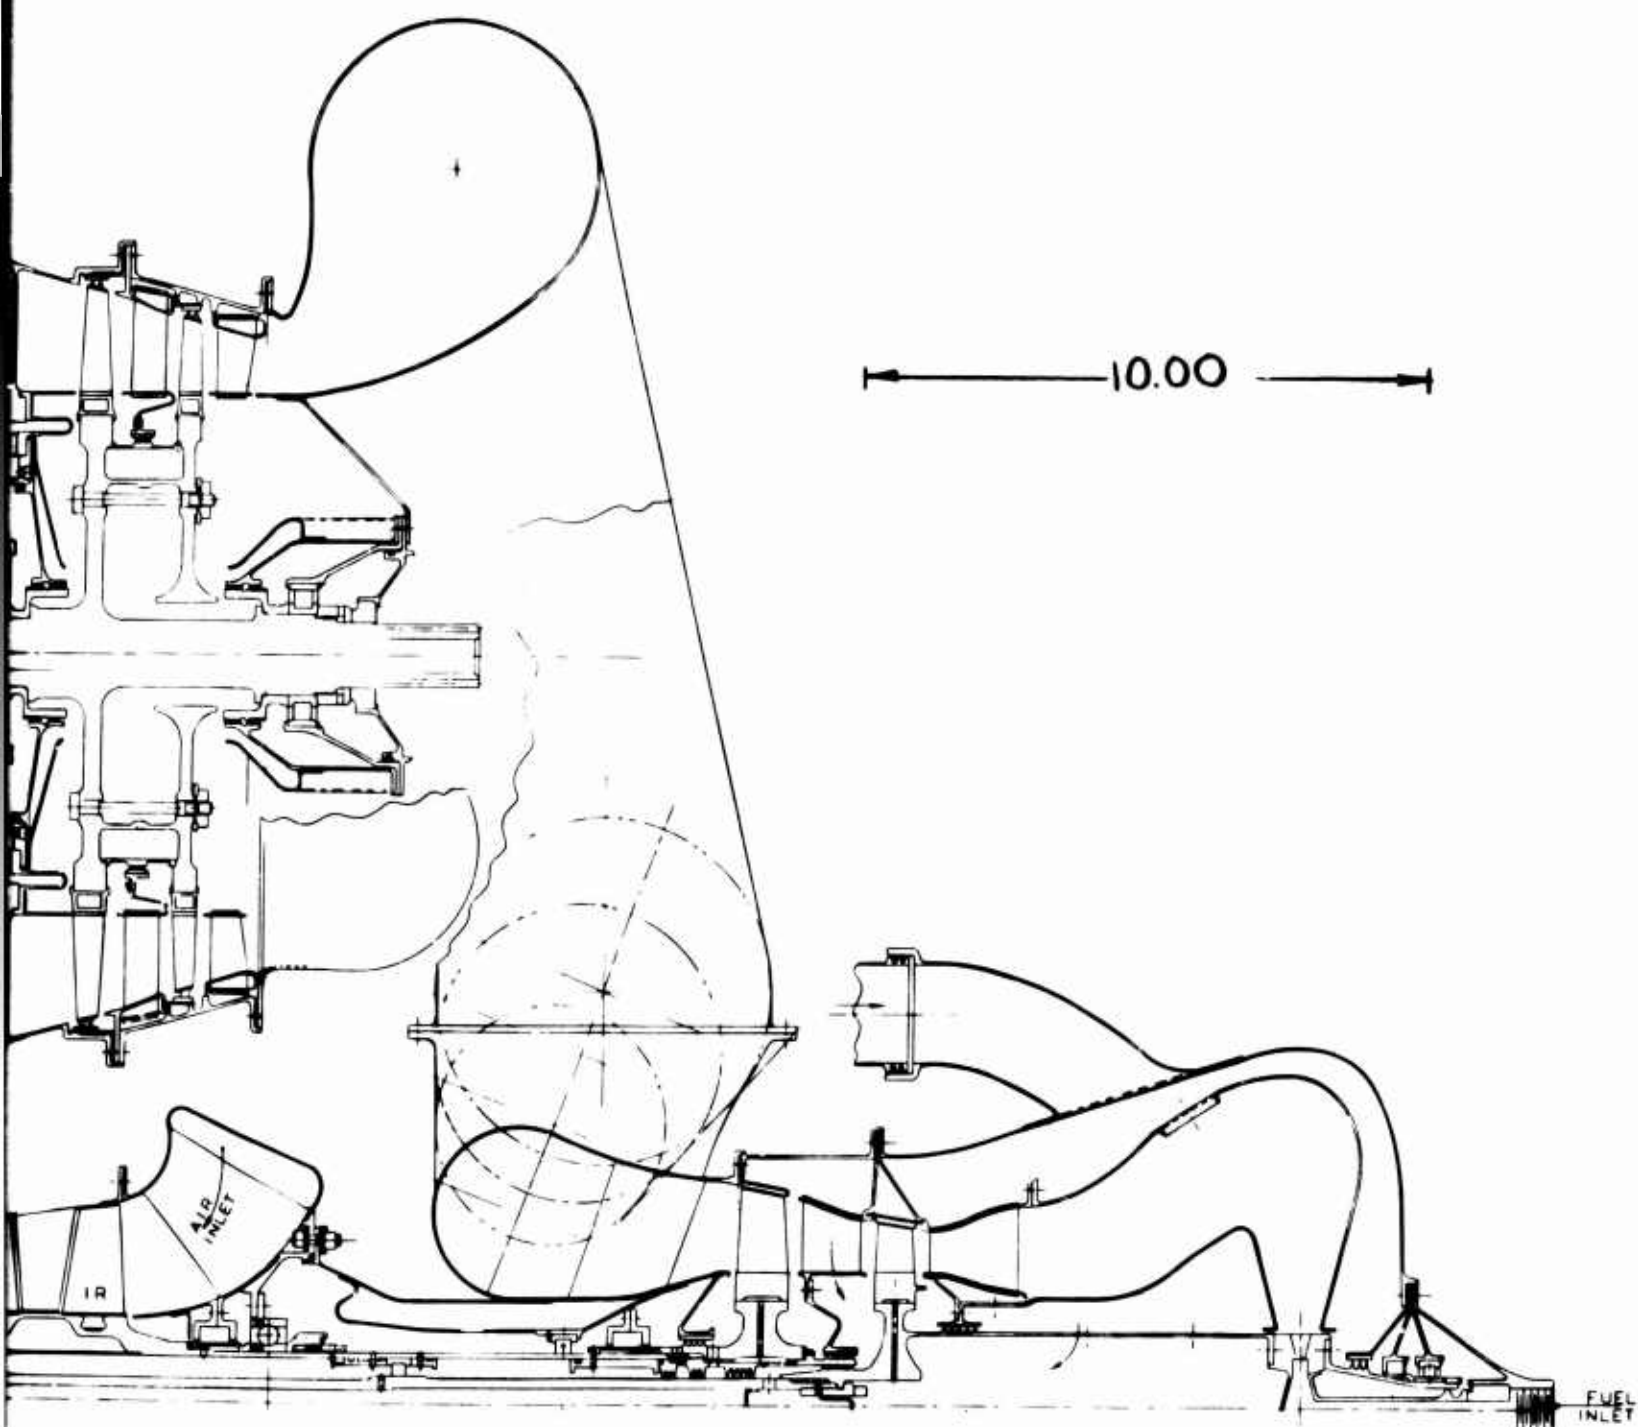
Typical non-regenerative engine arranged with the compressor inlet between the compressor and turbine, end mounting of the combustor and accessories and the power turbine on an offset parallel axis shaft.
